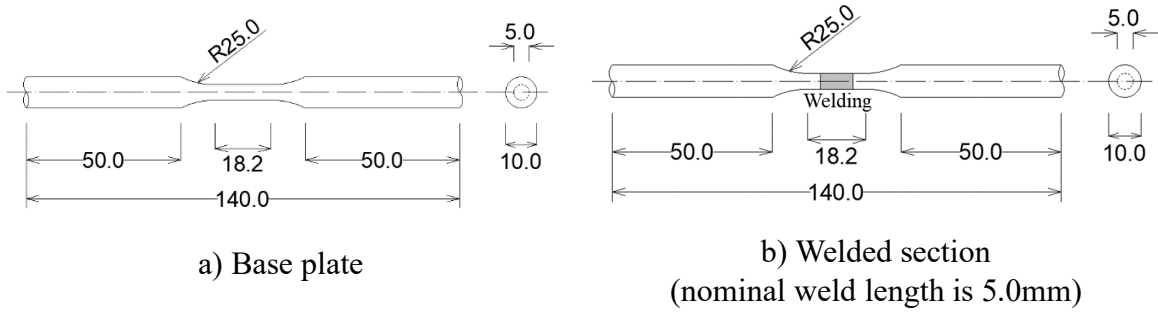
Dimensions of cylindrical coupons for fatigue tests: S690-QT
